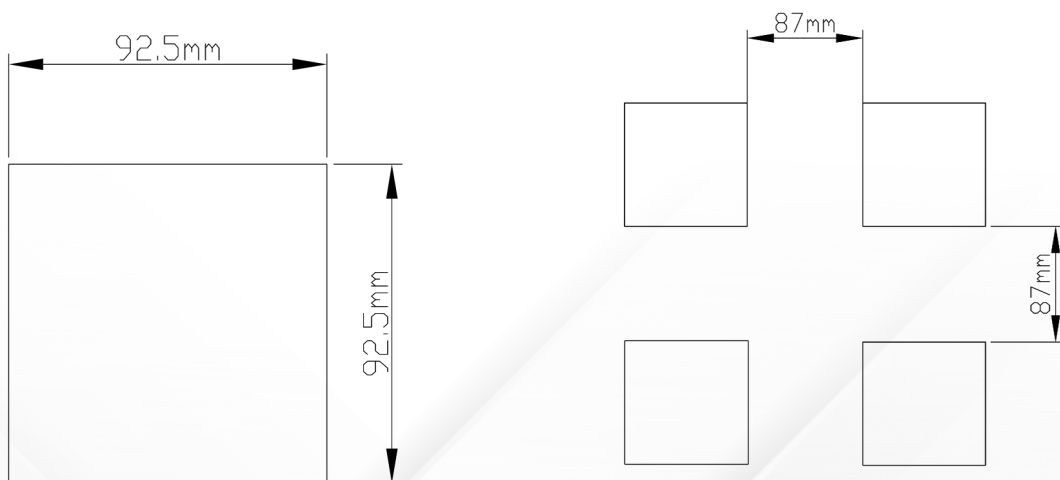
Dimensions of disk-mounted openings and minimum distance between square holes in instrument cabinets
